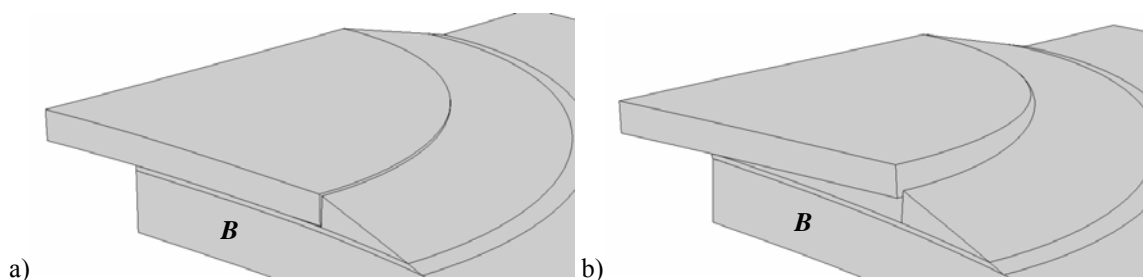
Deformed shape of the 15° straight fillet repair at damage onset (a) and patch debonding (b) (bending load).
